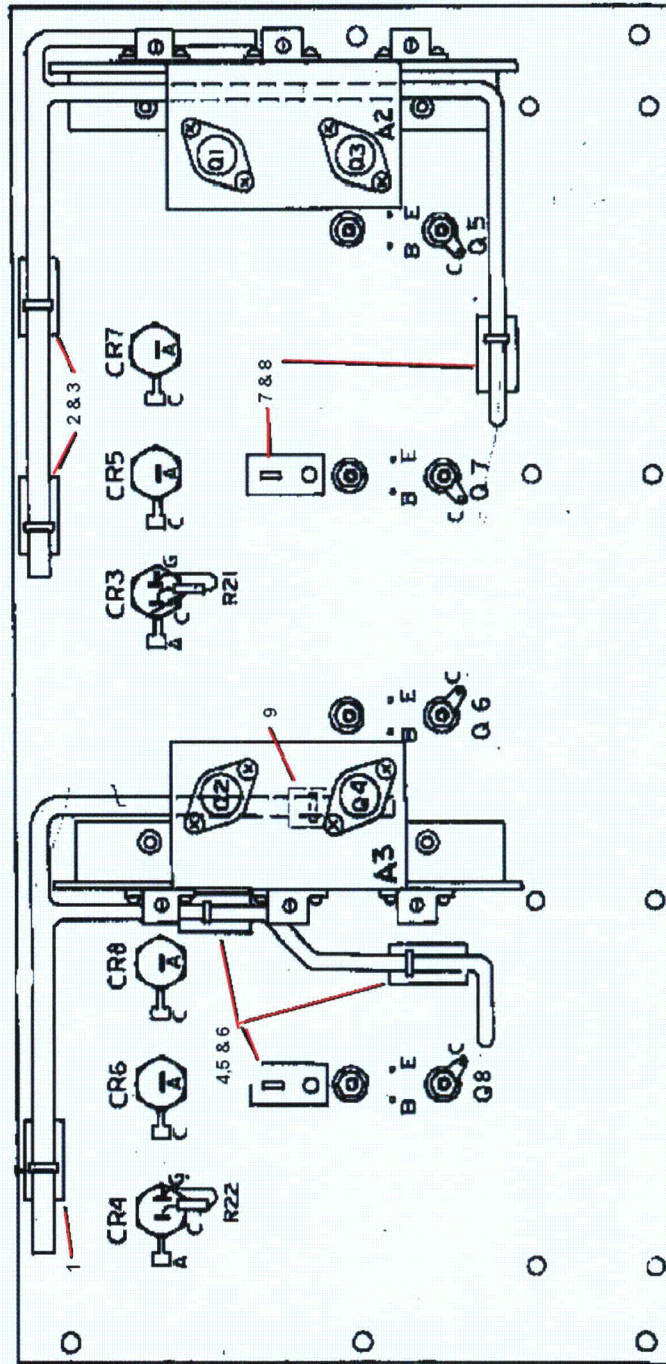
N-2ARPS-05 Heatsink Assembly TA
